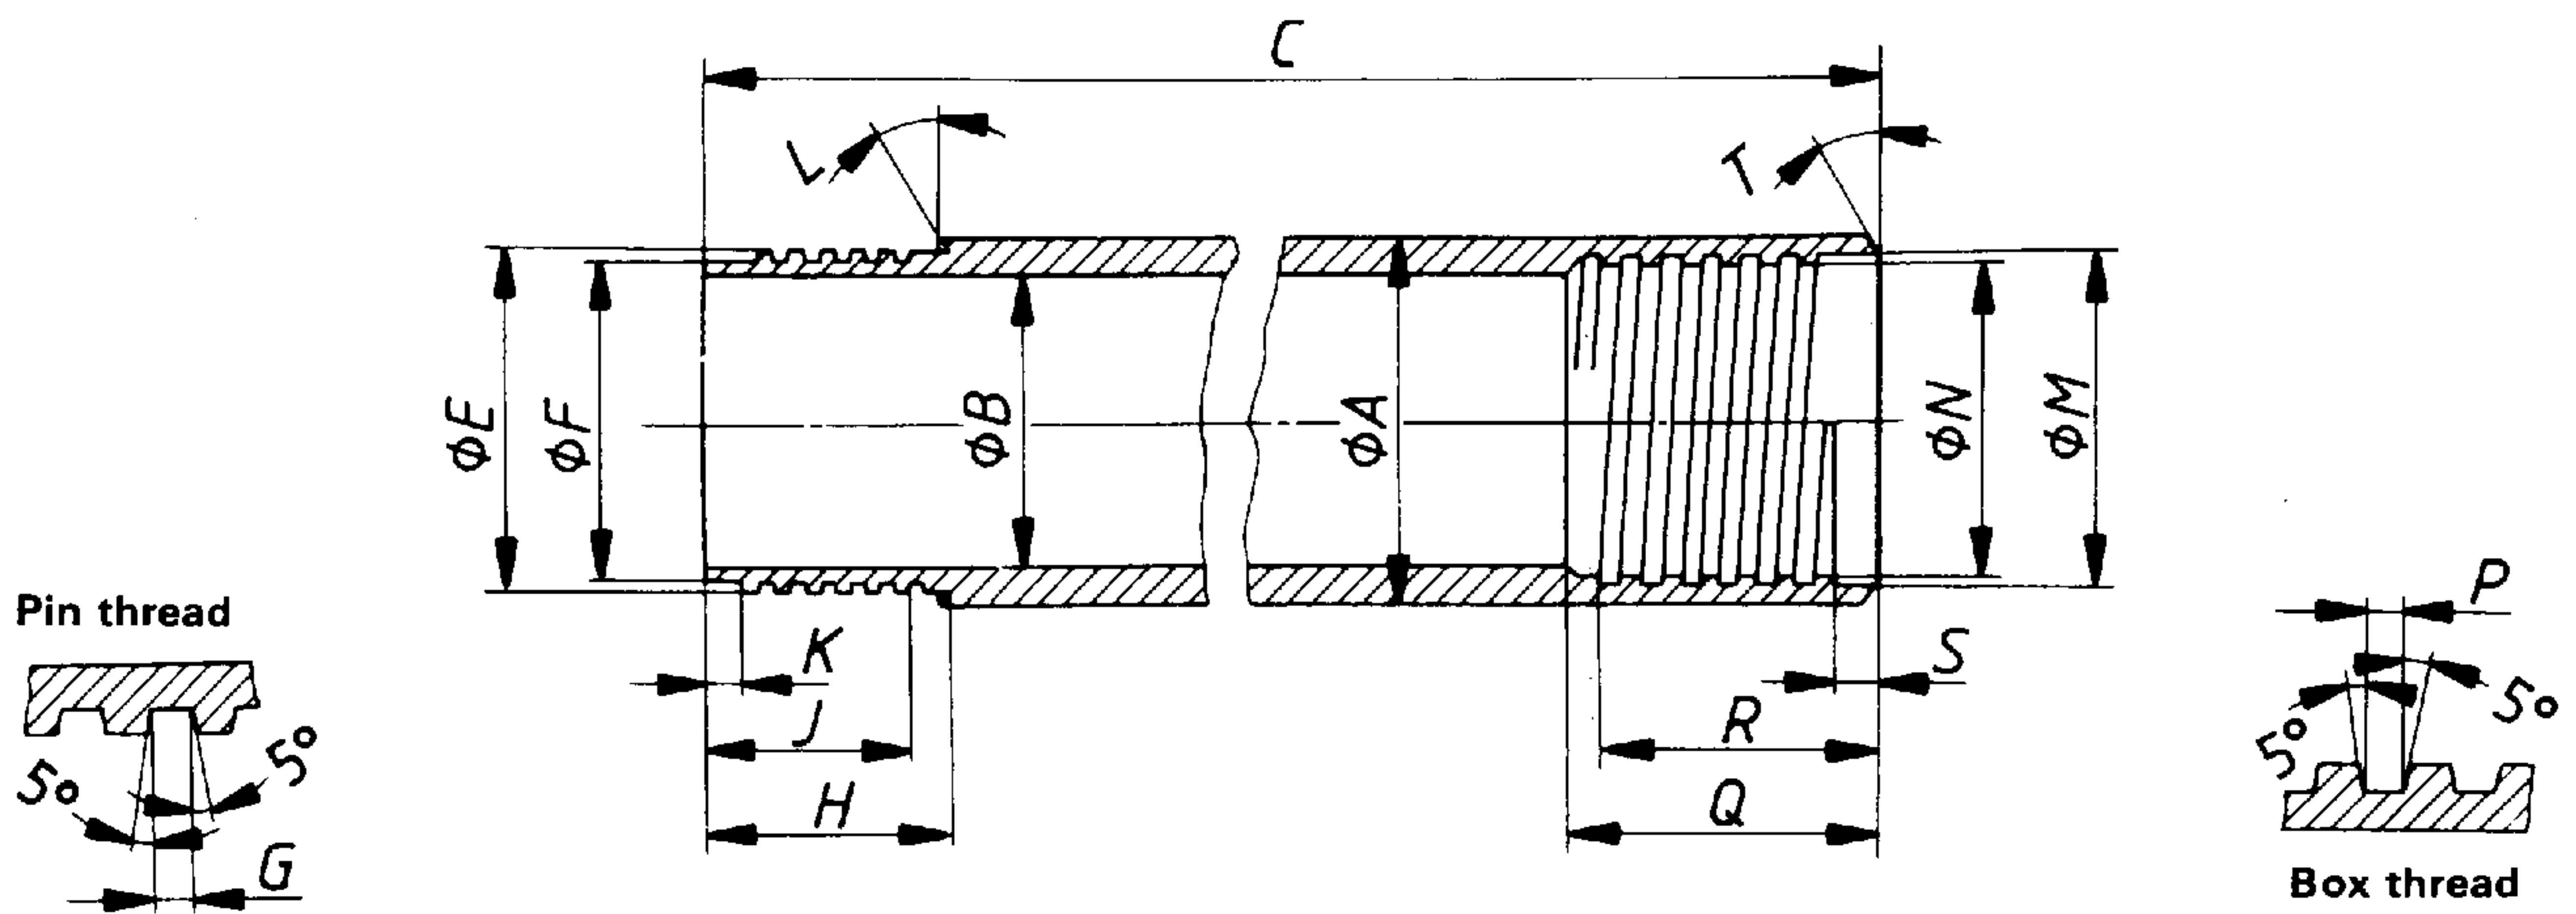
"WT" design double-tube core barrel — Outer tube (see table 48)
